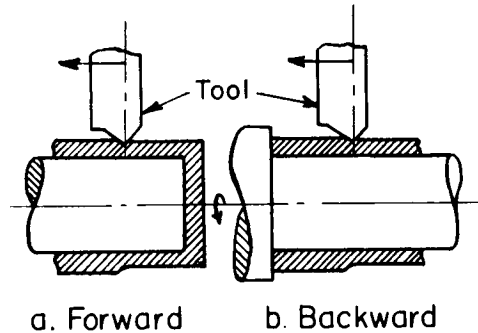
SCHEMATIC OF TUBE SHEAR FORMING (REF. 80)
